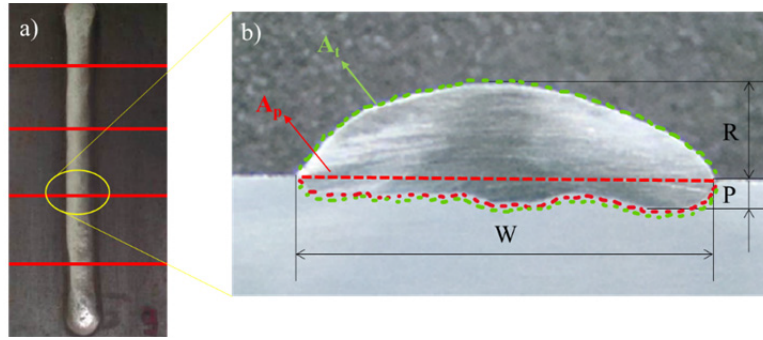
a) Welding bead cuts; b) bead geometry and parameters.
